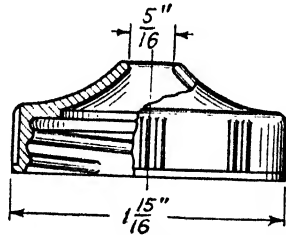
Dispenser type of bottle cap having a thread of rounded contour. This molding is stripped off the core that forms the thread, without unscrewing, but the plastic must be a flexible type or be stripped before it becomes too hard. Close tolerances cannot be ensured for stripped threads, however.
